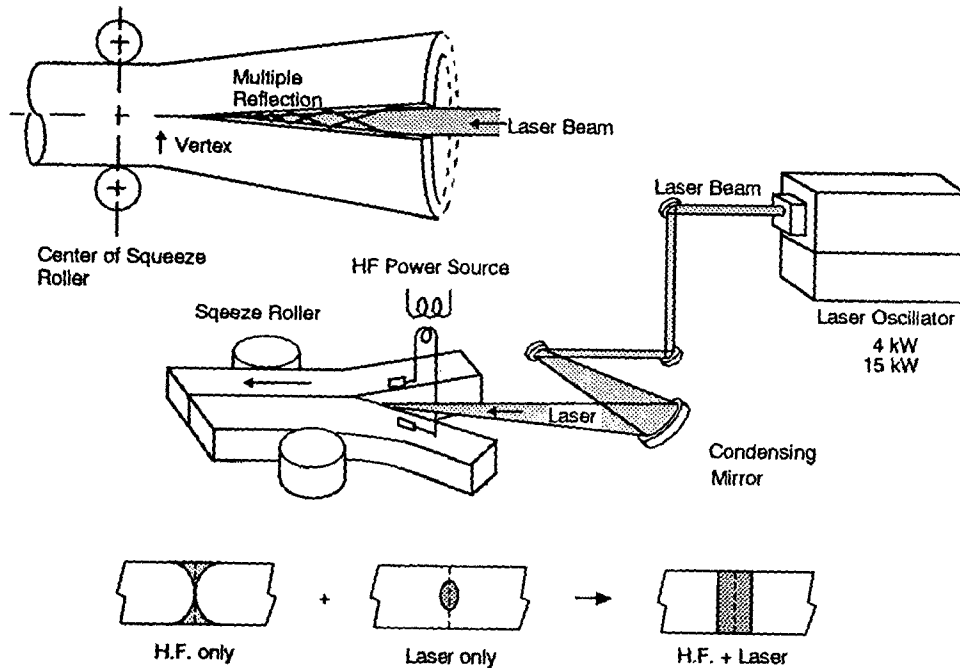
Hybrid HF and laser welding for production of pipe [8]
